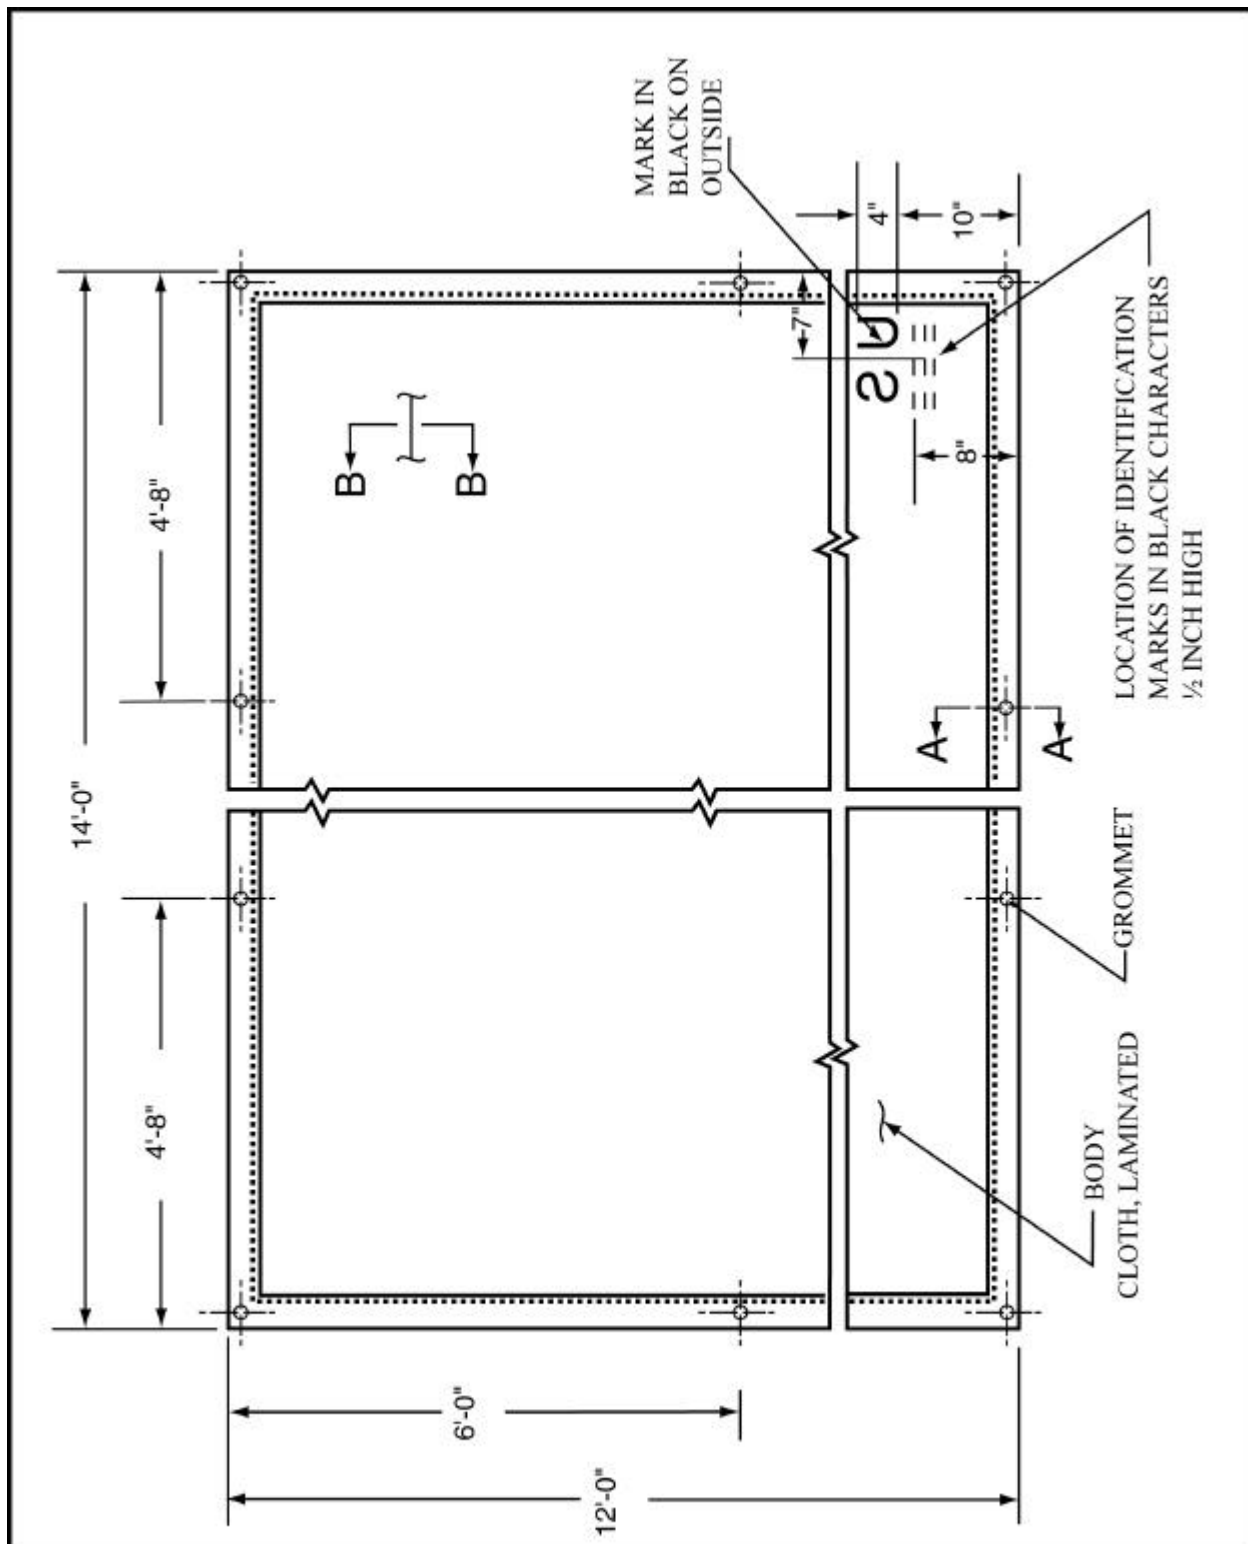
INSIDE VIEW OF TYPE II TARPAULIN
